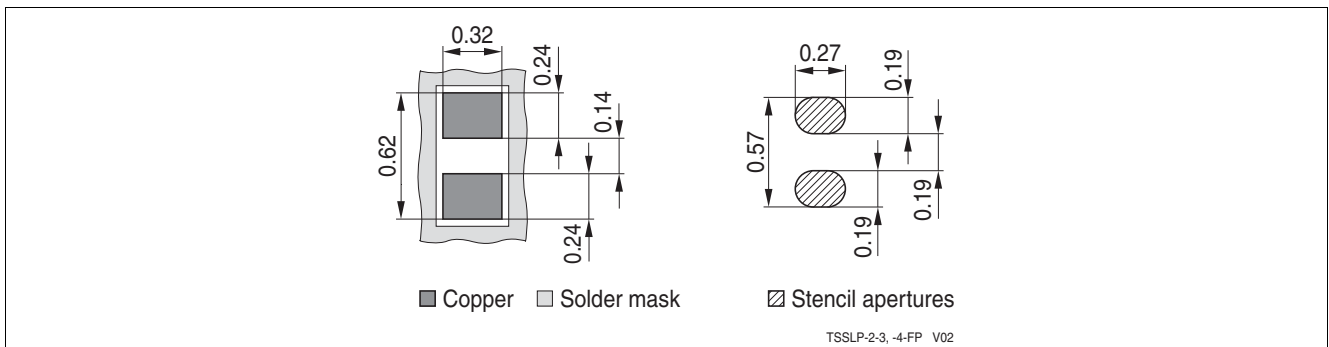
TSSLP-2-4 Footprint (dimension in mm)
